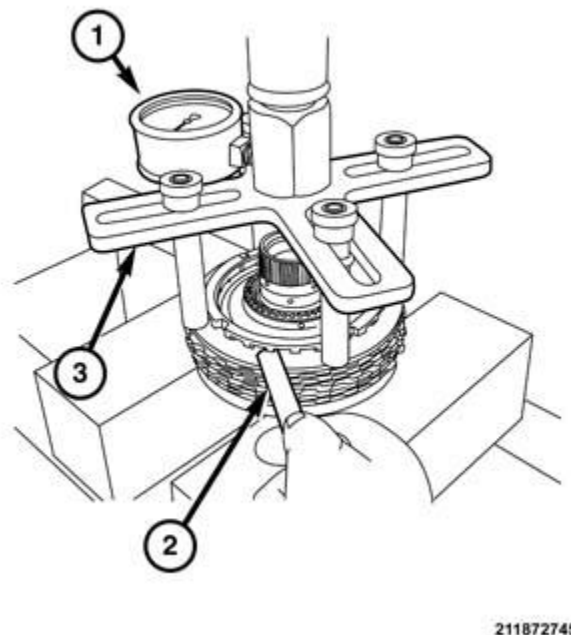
Measuring Gap Between Backing Plate & Retainer Of E-Clutch
